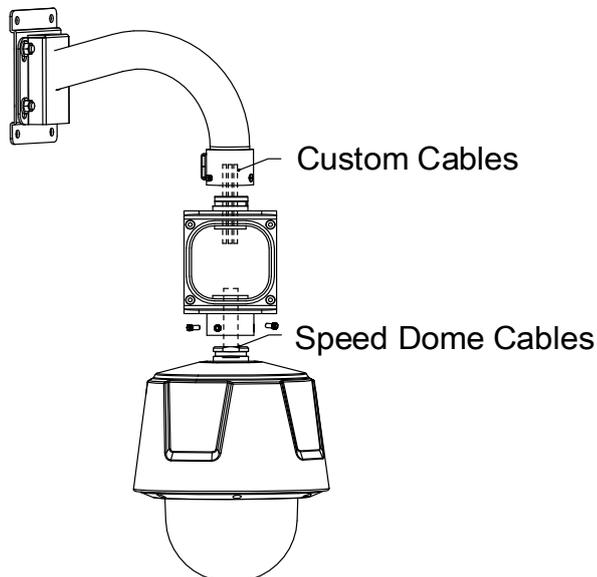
Assemble the Type II Gang Box and the Bracket
